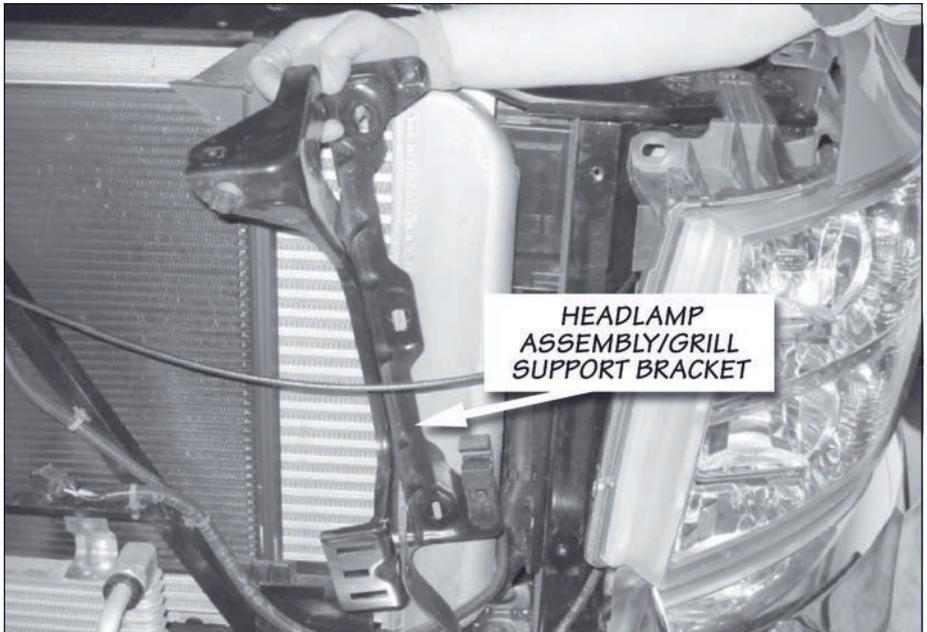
07-10 LMM: Headlamp Assembly/Grill Support Bracket
